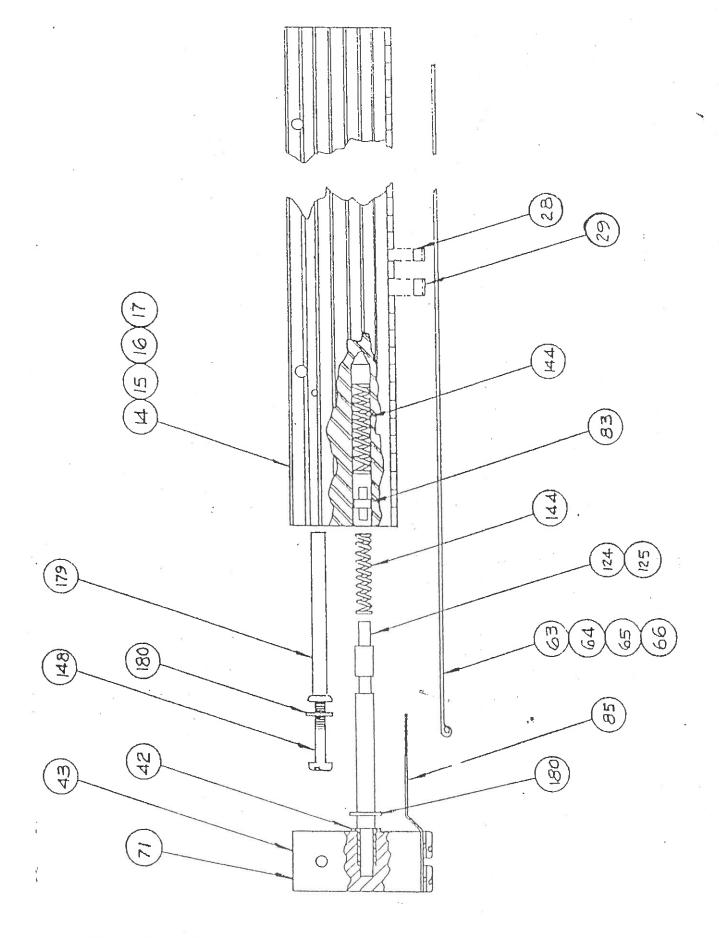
Electrode Bar Assembly, Complete, Front (Item 21, 22, 23, 24)
